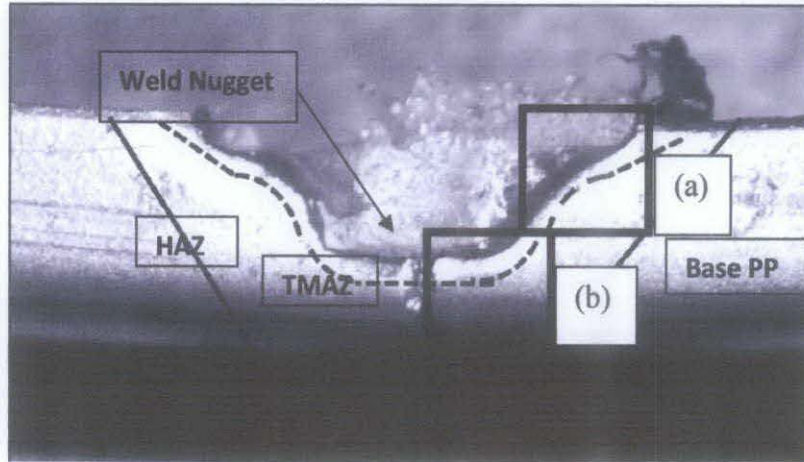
Photograph of surface finish of welded PP using FSW process.
